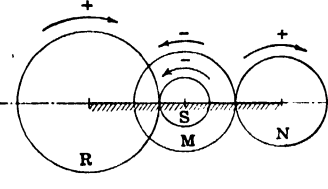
Compounded gears in fixed bearings. See equation (h), Fig. 10.
